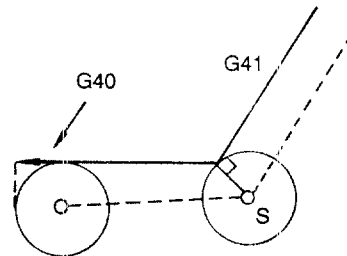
Straight-line to Straight-line at Outside Corner
